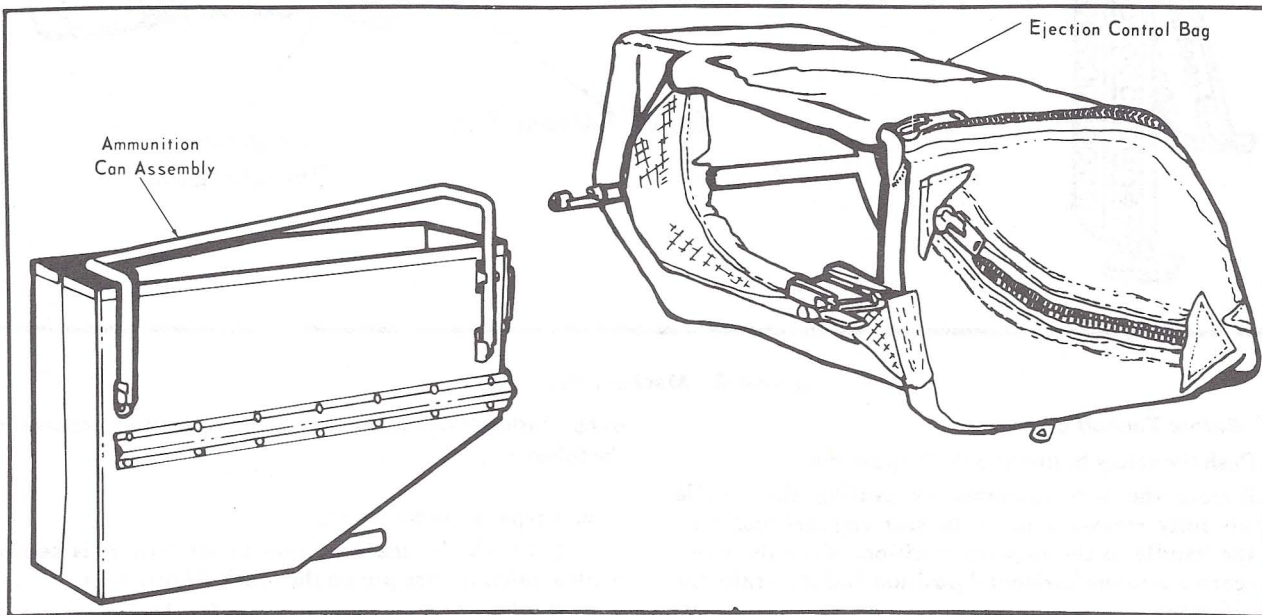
Ammunition Can Assembly and Ejection Control Bag
